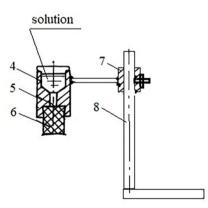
Device for copper plating. 4 - container, 5 - hole, 6 - foam rubber tampon, 7 - fixed sleeve, 8 - bracket installed in tool holder 3 of machine 2.
